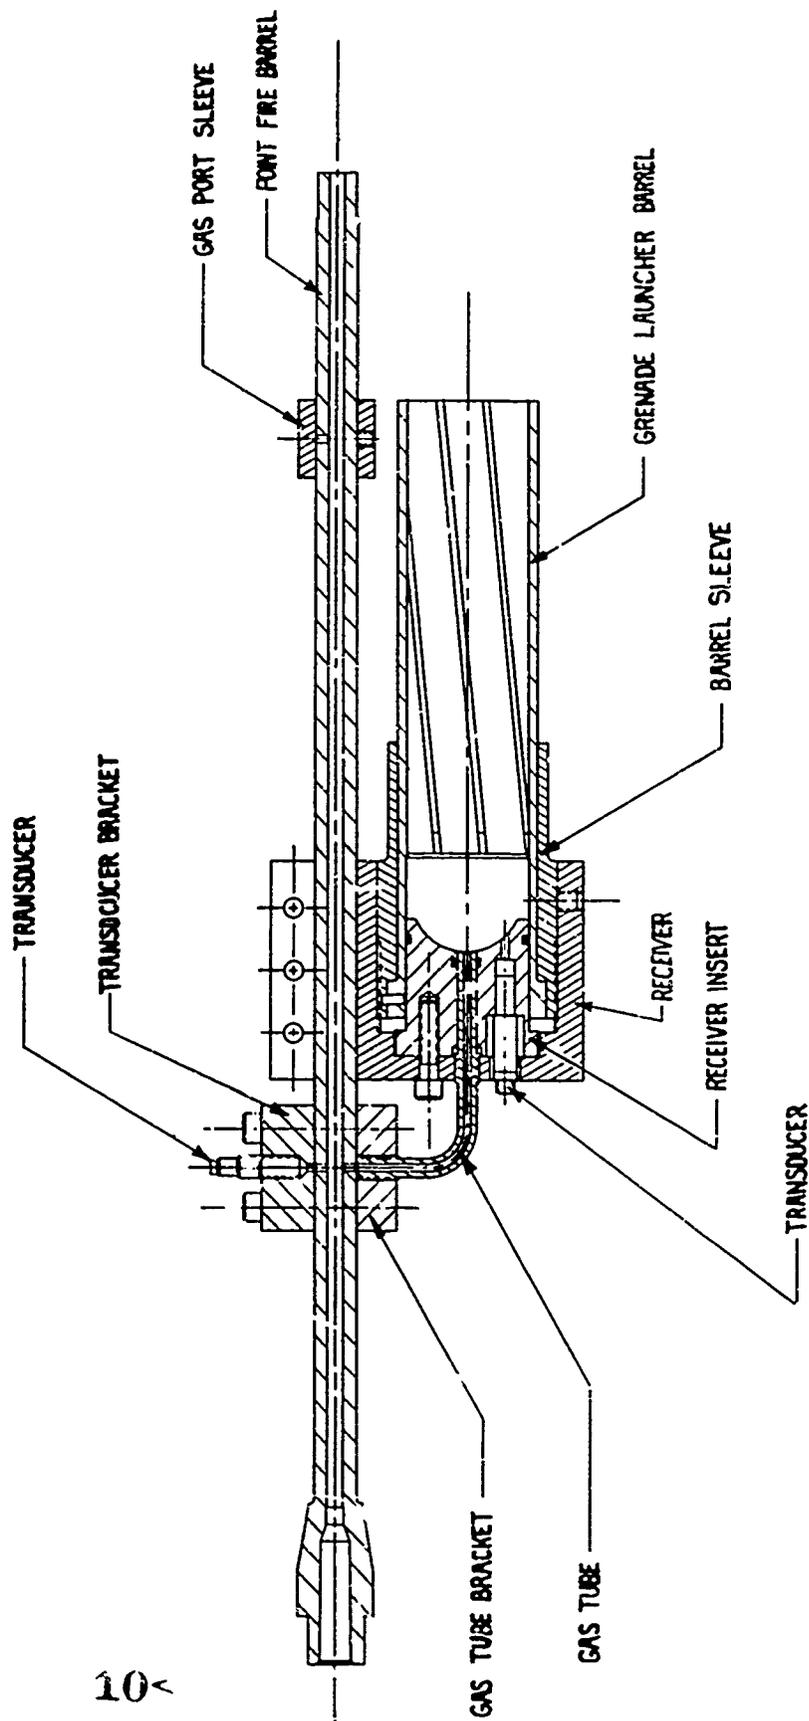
Cross Sectional View of Gas-Launched Firing Fixture
